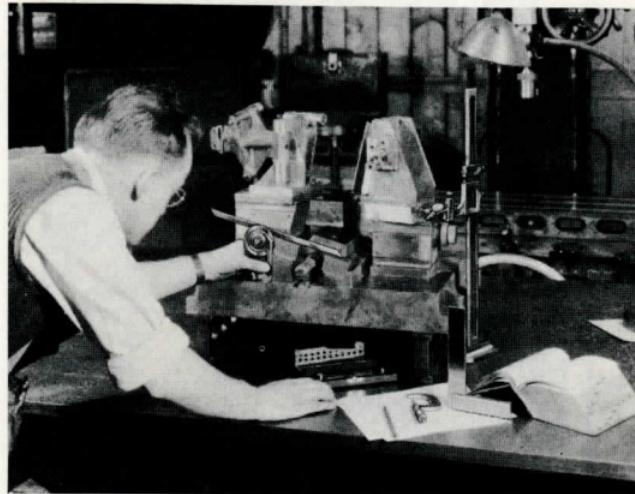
A Universal Bevel Protractor combines the features of a bevel and protractor. When equipped with a Vernier scale, it may be read to $1/12$ of a degree or 5 minutes.
